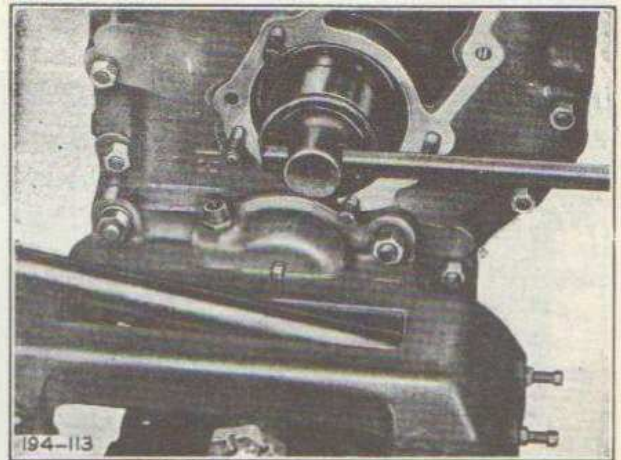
Installing Mainshaft Rear Bearing Locknut
